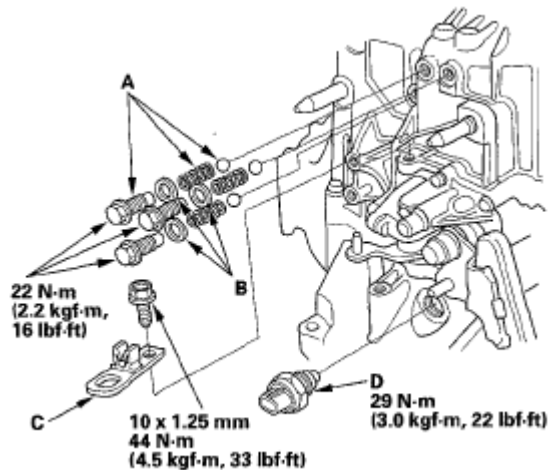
Identifying Detent Bolts, Springs, Steel Balls And Washers With Torque Specifications
